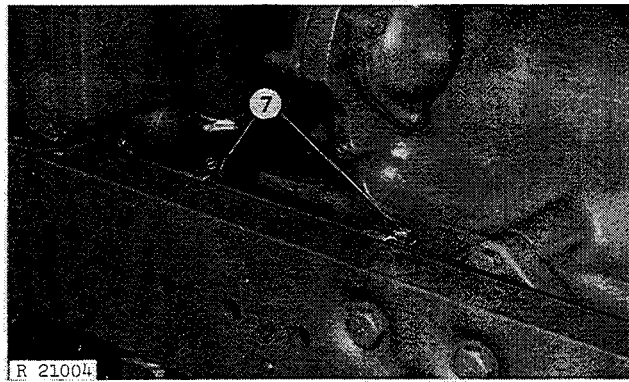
Hydraulic Return Oil Pipe and Clamp
